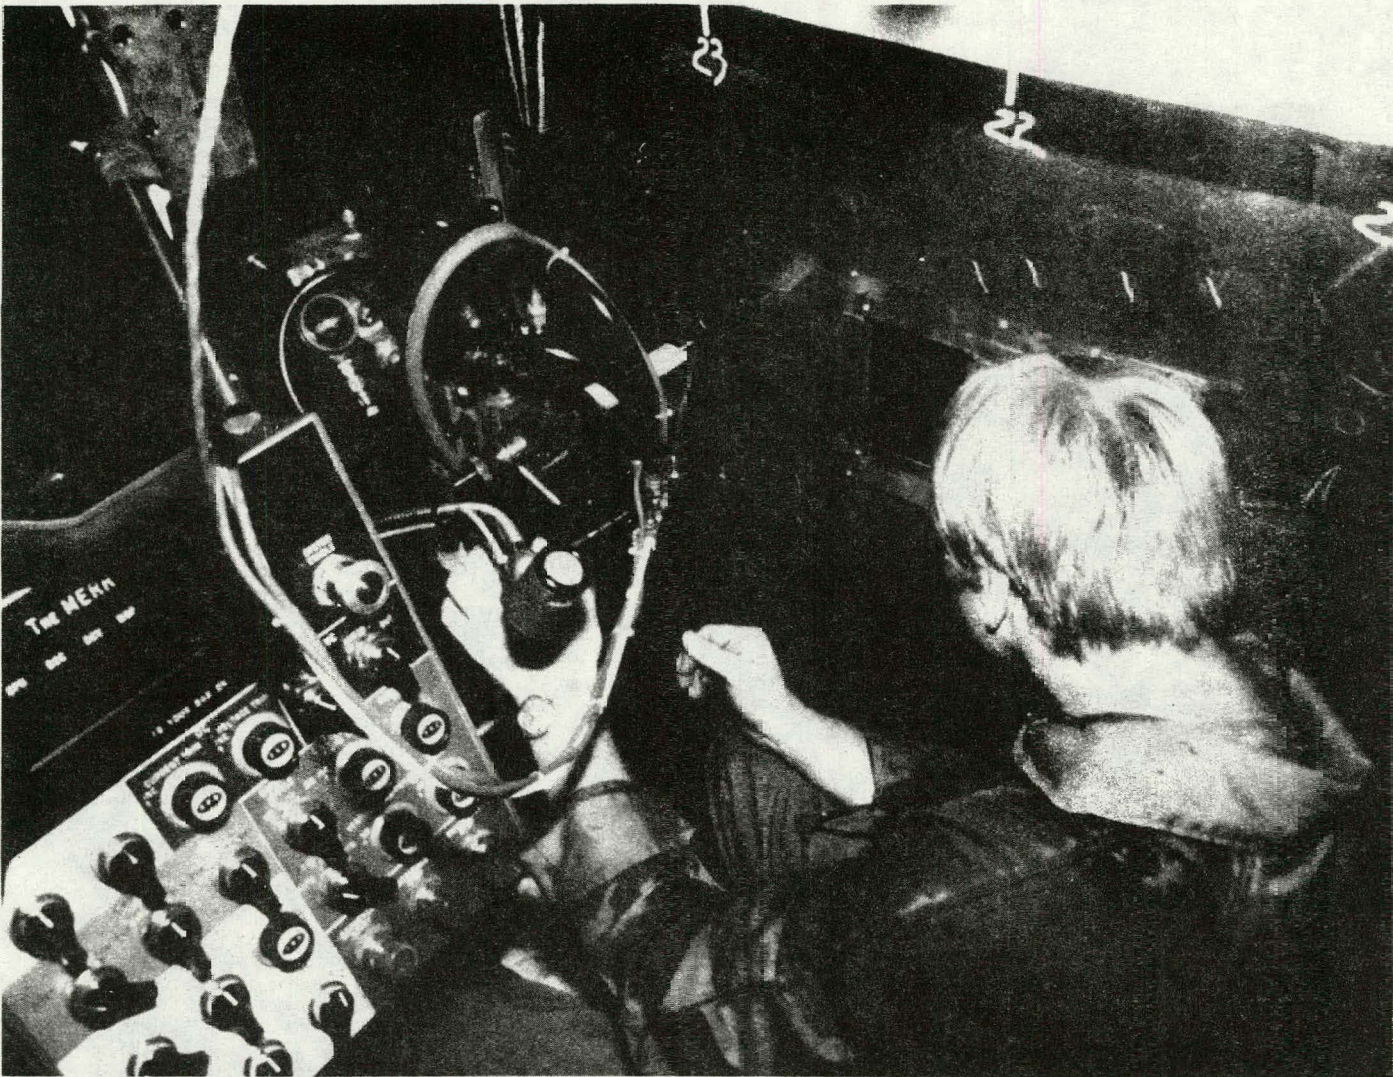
Setup for Narrow-Groove Hot-Wire GTA Welding in the Horizontal Position.
